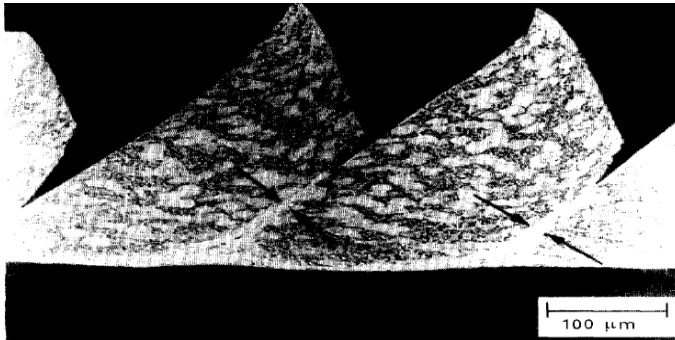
Characteristic “sawtooth” shaped chip removed by hard turning [2]
